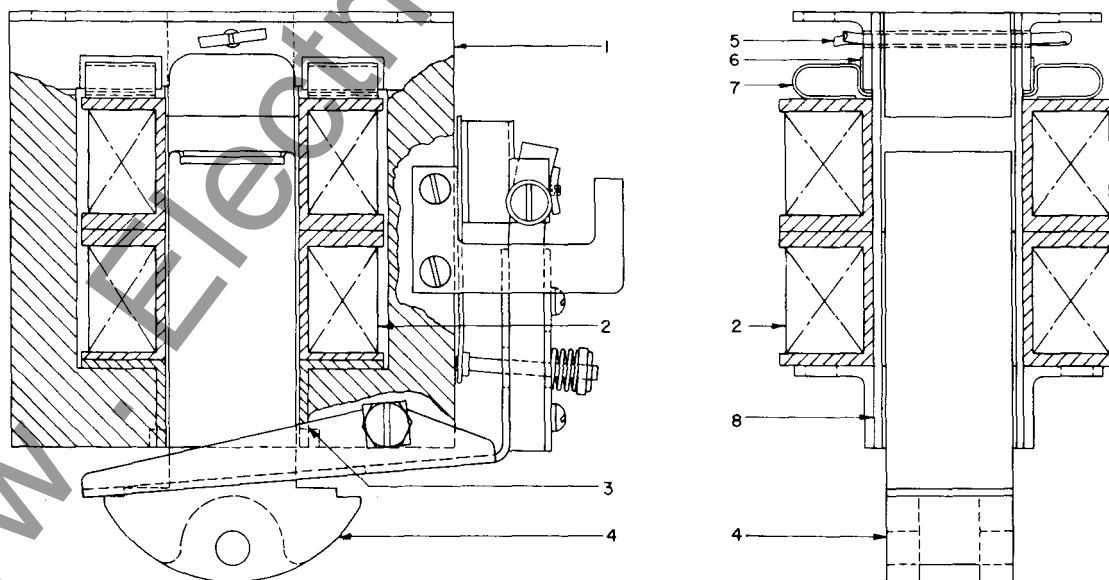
CR9503-206B and -211E solenoids with cutout switch
